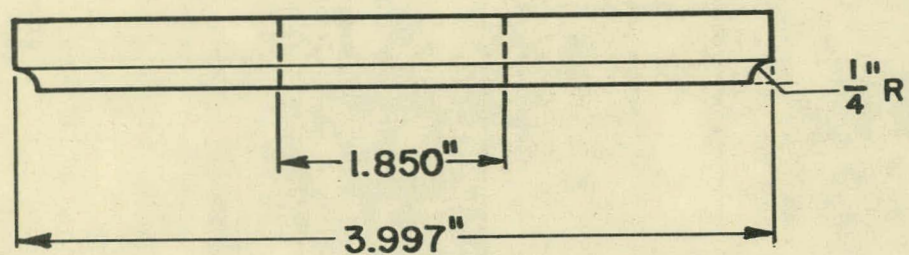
Spacer and holder for O-ring gasket for cold hydrostatic pressing unit.
